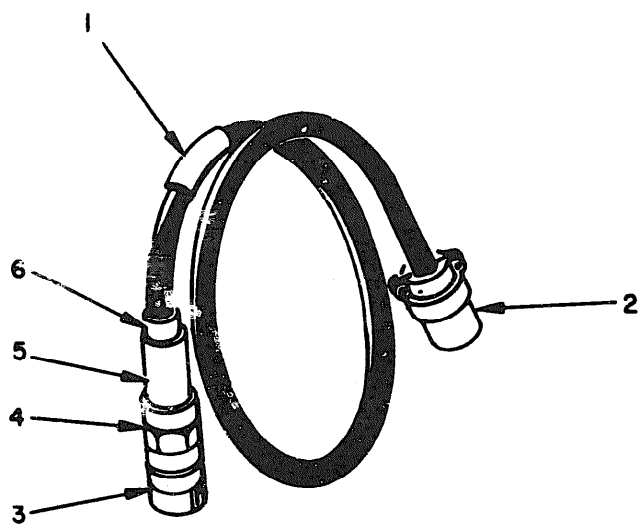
Cable Assembly, Electrical Power CX-11628/APM-123.
